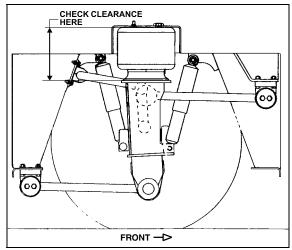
TYPICAL AIR SPRING CLEARANCE, FRONT I-BEAM AXLE
